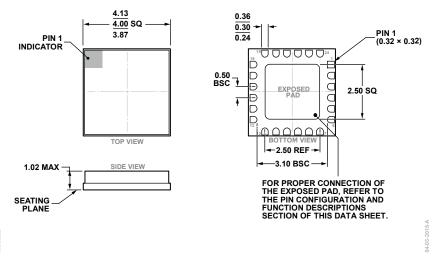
24-Terminal Ceramic Leadless Chip Carrier [LCC] (HE-24-1) Dimensions shown in millimeters
